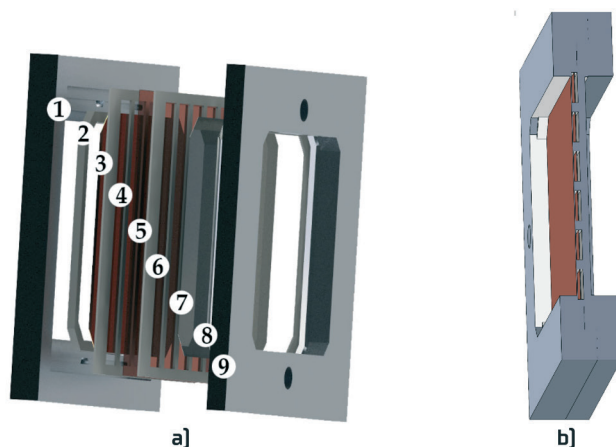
View of the compact heat exchanger: [a] components 1,9 – aluminum covers, 2,8 – silicone gaskets, 3 – PV solar cell with glass, 4 – silicone gasket forming the hot mini-channel, 5 – copper plate between two mini-channels, 6 – silicone gasket forming the cold mini-channel, 7 – copper plate, [b] group of mini-channels
